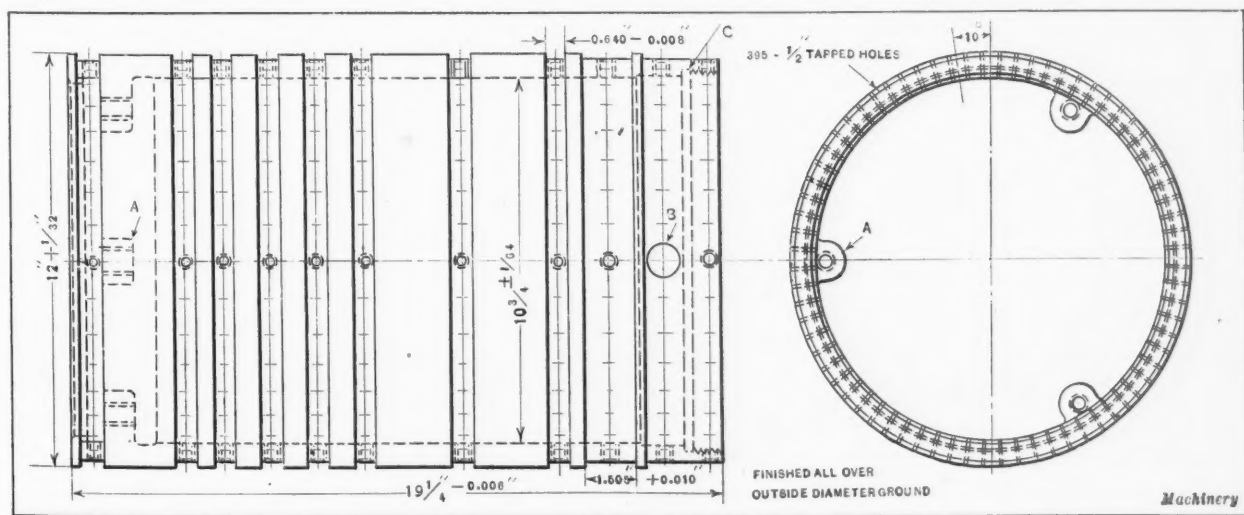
Design of the Cam Drum with which Fay Automatic Lathes are equipped
